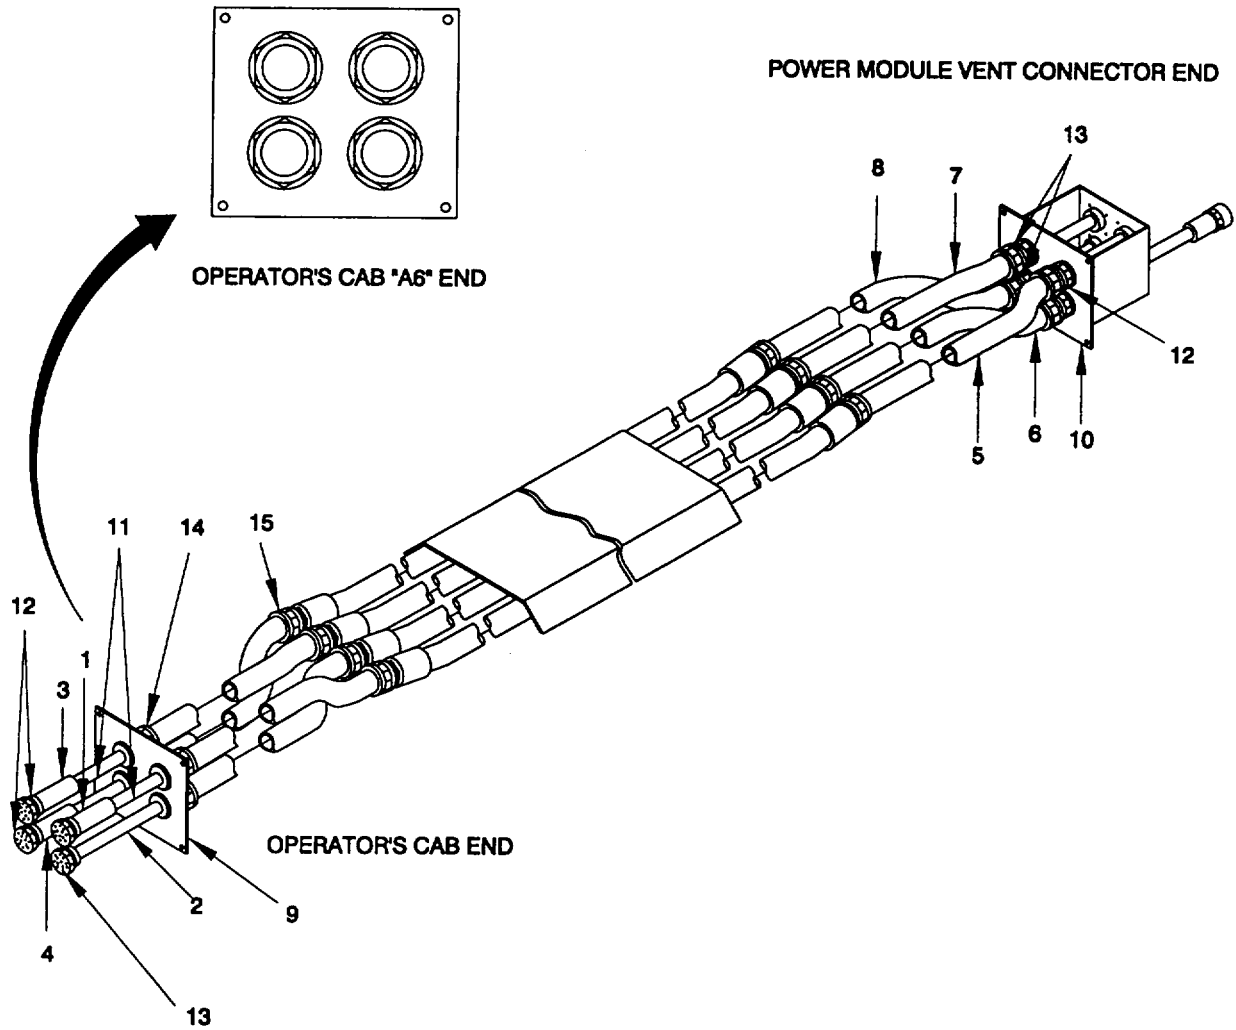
Module Interconnect Assembly, Remove/Install.
